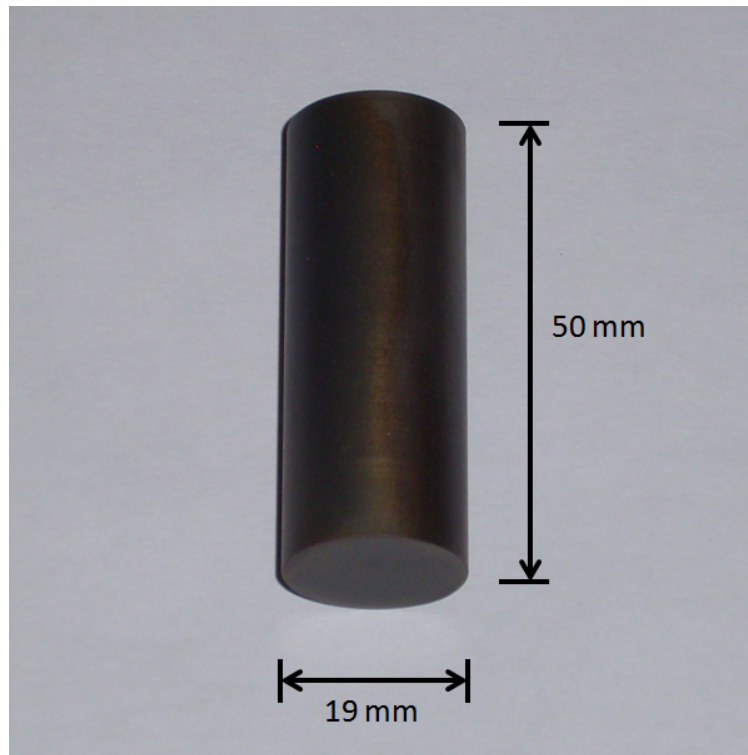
Unsupported shear punch fabricated from A2 tool steel.
